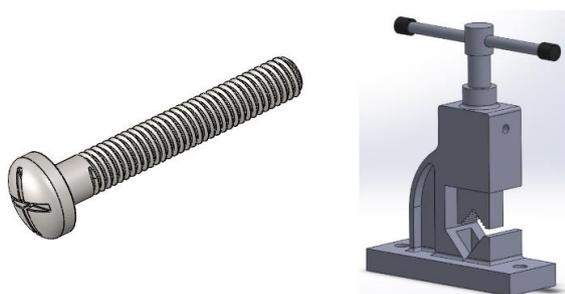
Example of the third test: Task 1 – Create appropriate machine element; Task 2 – Create assembly based on the given components
